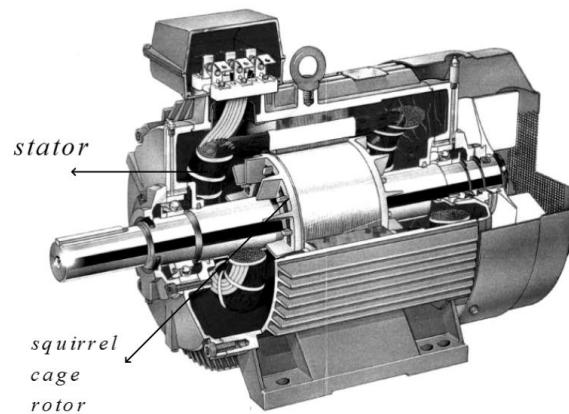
The Cut View of Squirrel Cage Induction Motor
